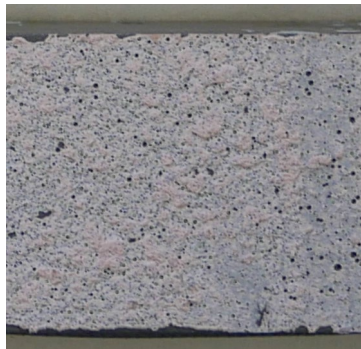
Detailed fracture surface of the S-82-1 tested specimen.
